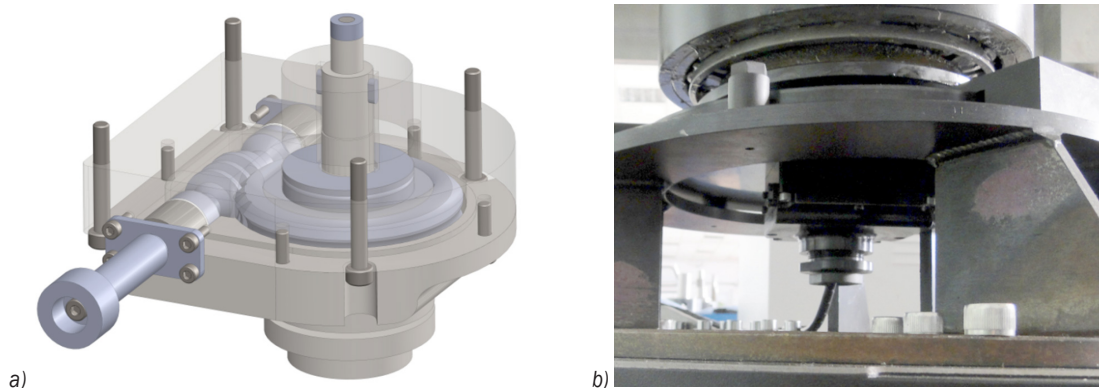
a) Model of the assembly height measuring unit, and b) location of the assembly height measuring unit
